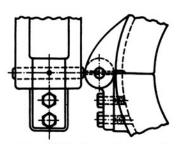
Cover lugs cast integrally, and pivot pins fastened in loose piece for greater span.
